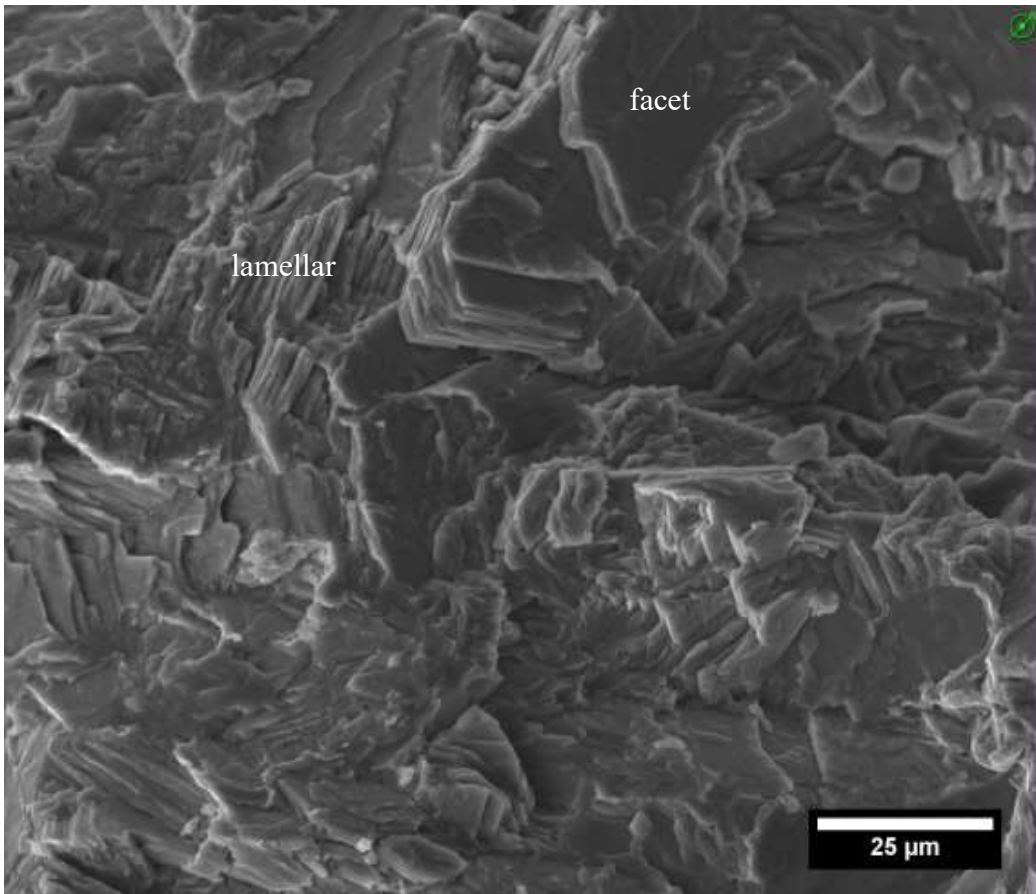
SEM-SE fractography of As-cast (L-T) fatigue fracture features in the overload regime at  $R = 0.1$ . Crack direction is from top to bottom. The fracture surface shows large facets and lamellar microstructure.
